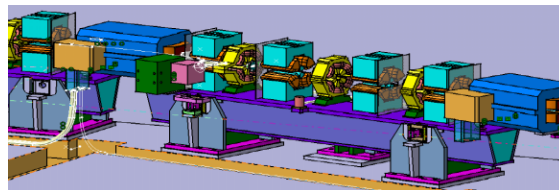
Example of a SOLEIL girder assembly. Quadrupoles, sextupoles and BPMs are rigidly mounted on girders. Bending magnets are bridging adjacent girders [6].
